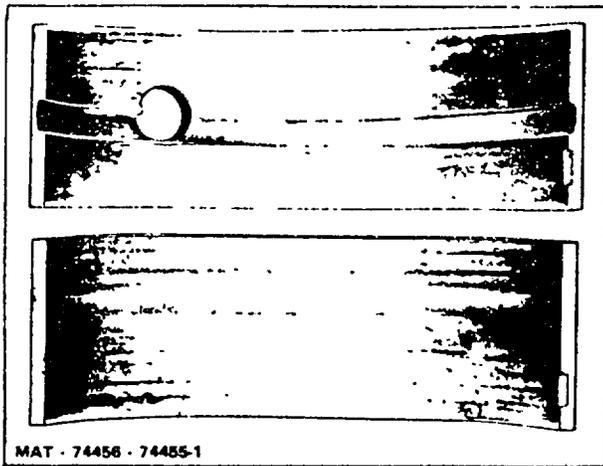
Scored Bearing Due to Dirt or Lack of Lubrication
